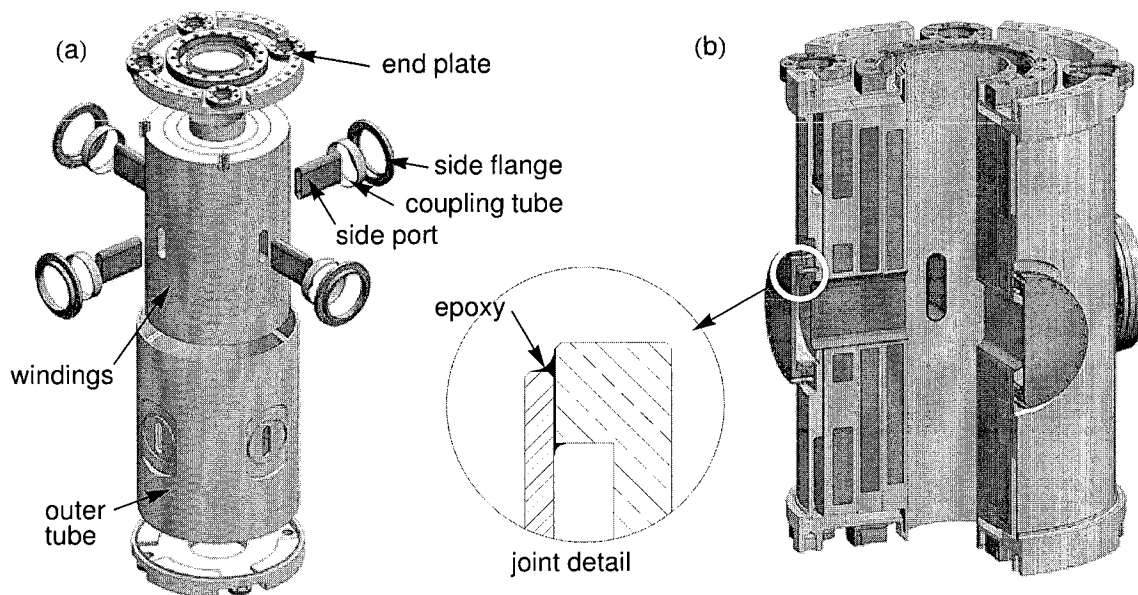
(a) Exploded view of the liquid helium enclosure. (b) Cut-away view with a detailed view of an epoxy joint.
